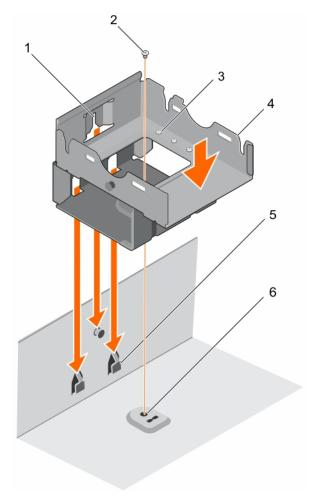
Installing the (optional) 2.5 inch internal hard drive cage
